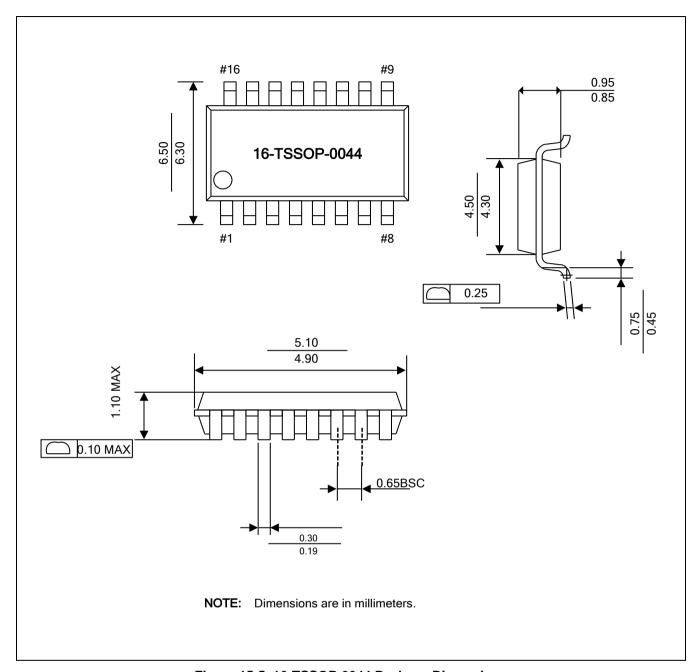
16-TSSOP-0044 Package Dimensions
